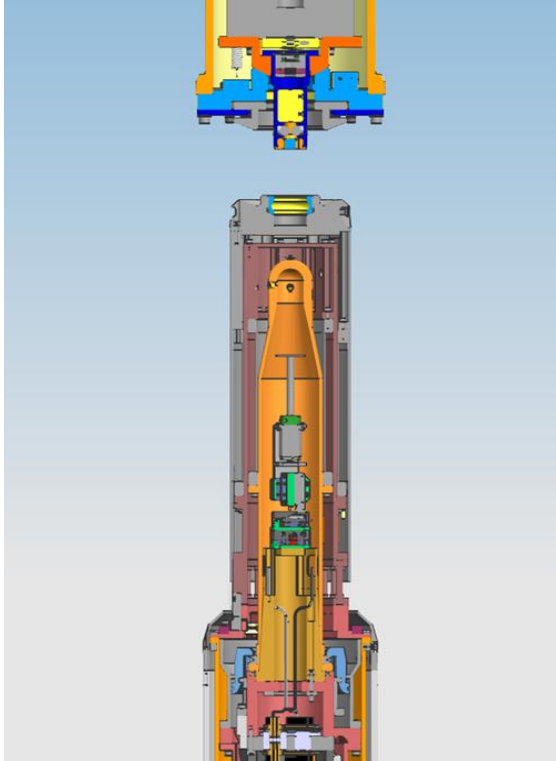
CAD assembly of the upper section of the moving cryostat transfer cart (MCTC) and gripper.
